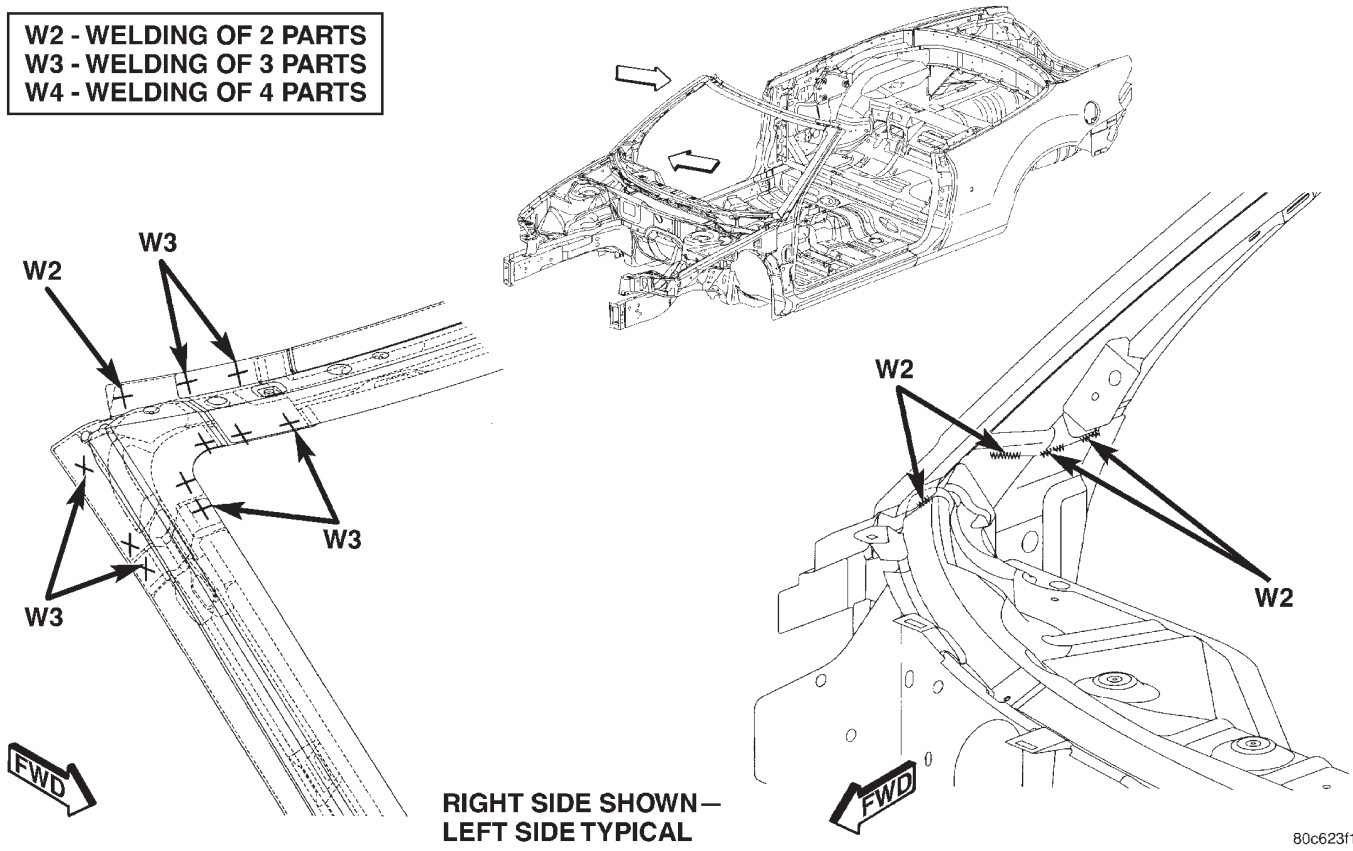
LOWER WINDSHIELD HEADER TO UPPER WINDSHIELD HEADER
